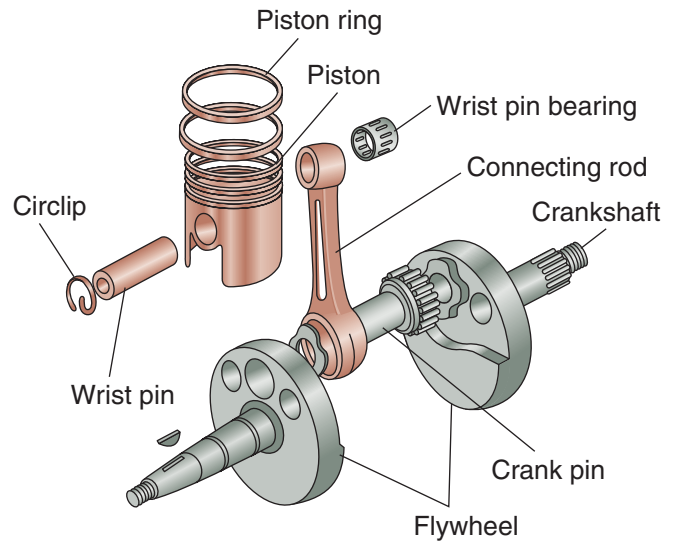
The piston and its related parts are attached to the crankshaft via the connecting rod.
